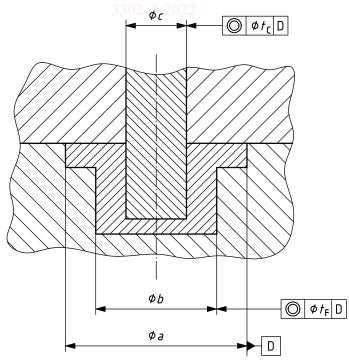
Example of coaxiality tolerances for a moulded product
